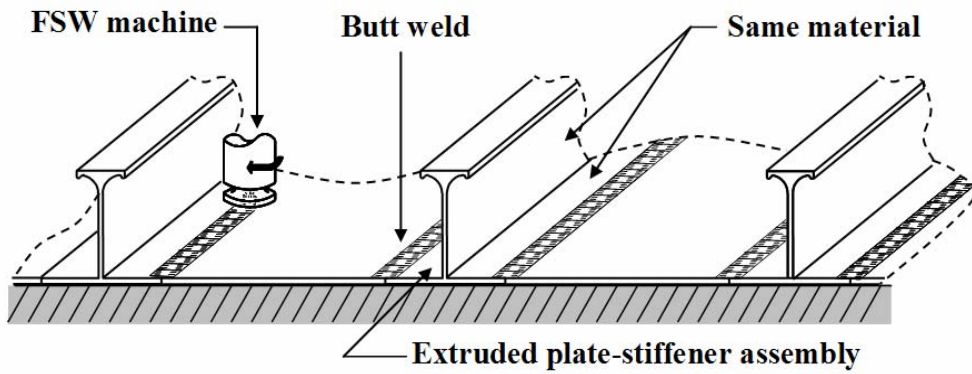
(c) Schematic of FSW for butt-joining on the extrusion side between the plate sheet and the extrusion (Method C-1)
